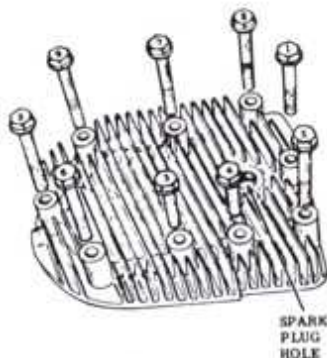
View showing cylinder head cap screw tightening sequence used on early HH80, HH100 and HH120 engines. Tighten cap screws to a torque of 200 in.-lbs. (22.6 N·m). Note type and length of cap screws.
